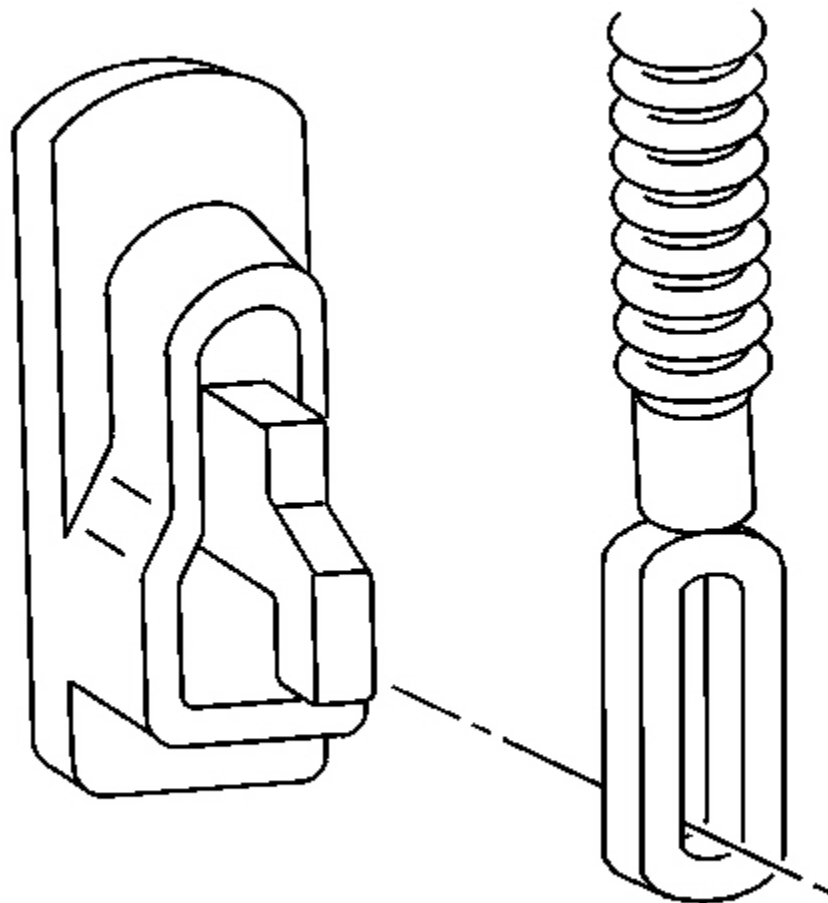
Rear Park Brake Cable To Rear Suspension Mounting Bracket
